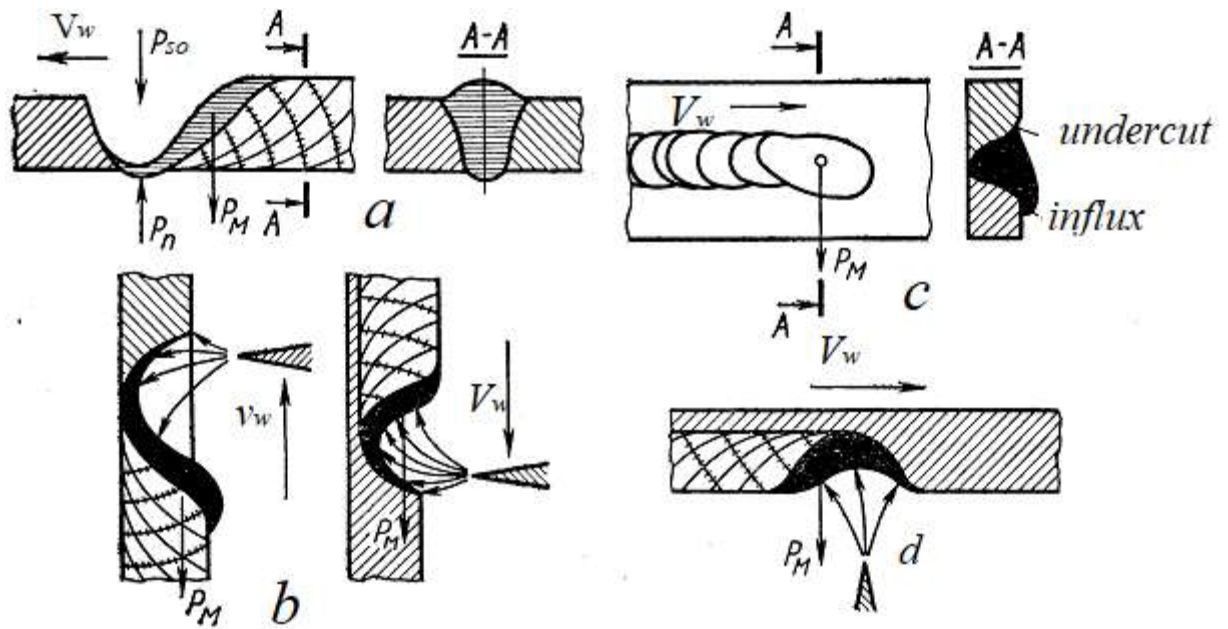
Scheme of forces acting in the weld pool and seam formation in different spatial positions:
